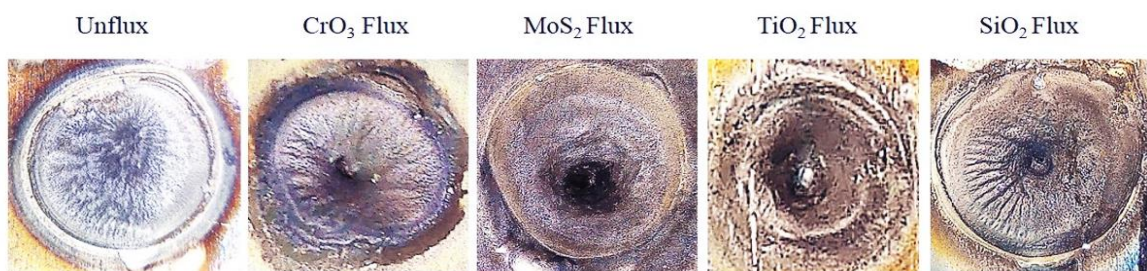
Top surfaces appearance of GTAW (unflux) and A-TIG weld coupons
